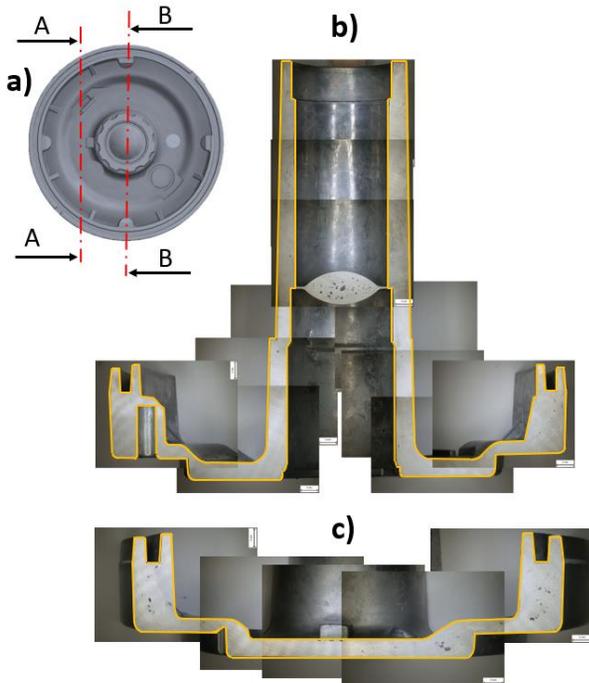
Example of control sections by casting A55; a) Location of sections; b) Section B-B castings; c) Section A-A castings
